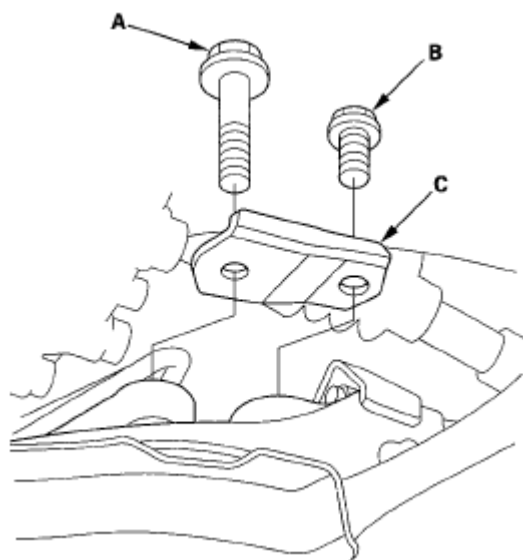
Identifying Front Steering Gearbox Mounting Bolt, Stiffener Mounting Bolt And Stiffener
